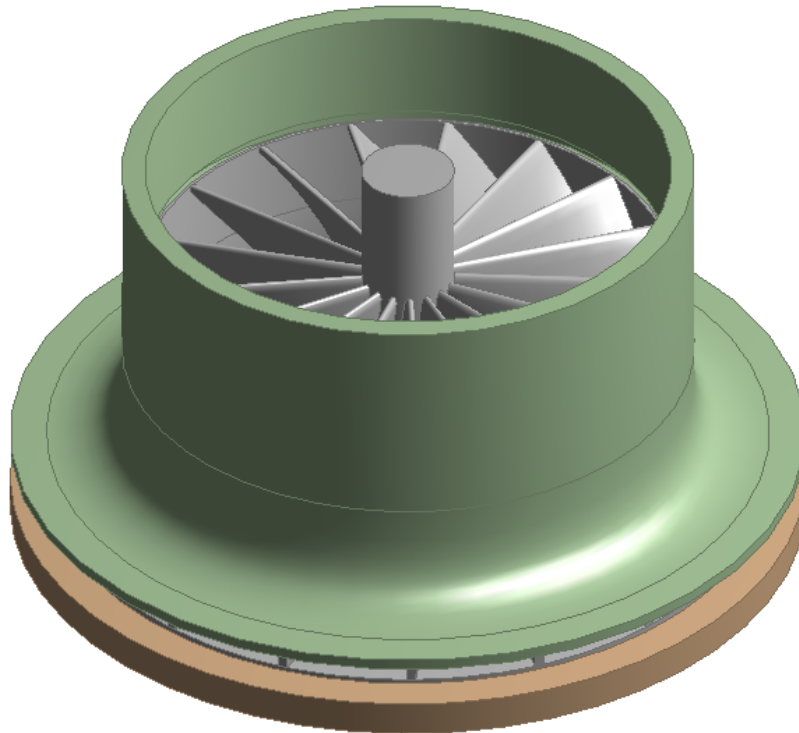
Model of the complete impeller, shroud, and seal system from Song et al.
